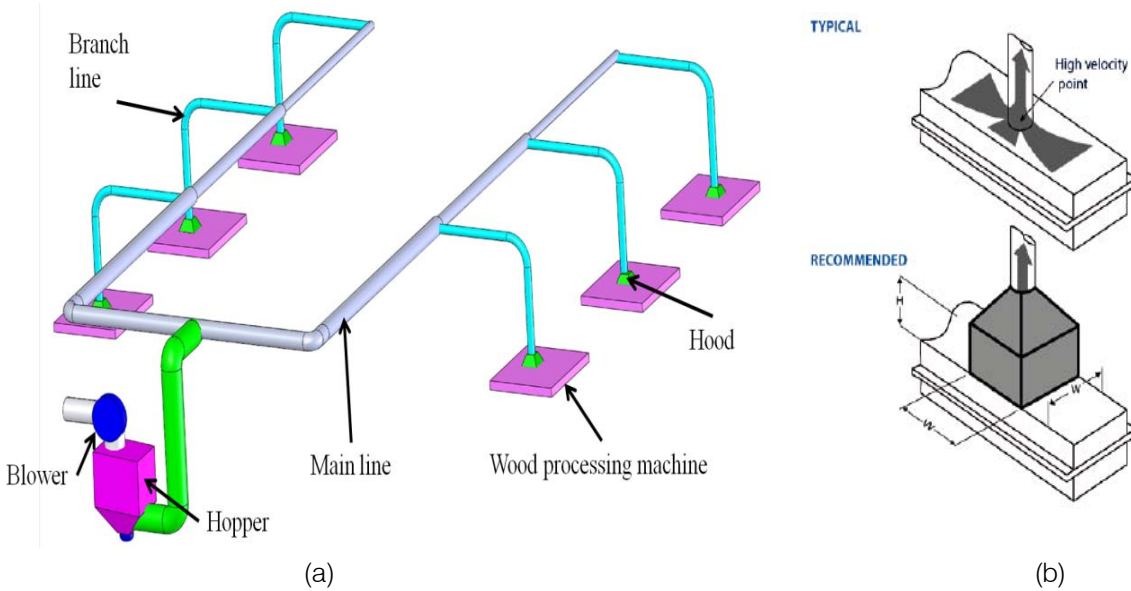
(a) Layout of improved central dust collection system, (b) Recommended hood design
